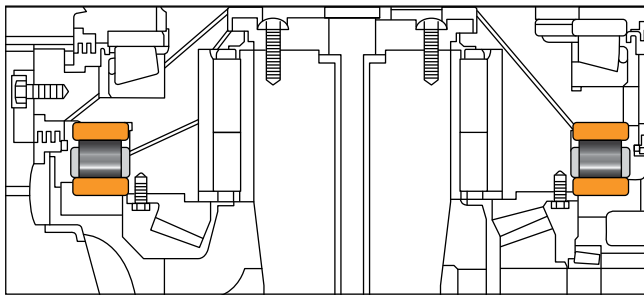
Typical mounting arrangement of thrust cylindrical roller bearing in crusher application.
